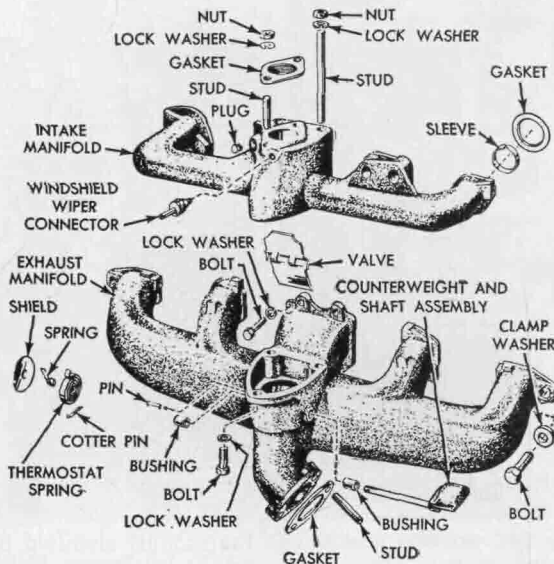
Intake and exhaust manifolds for a six-cylinder engine. (Ford Division of Ford Motor Company)
